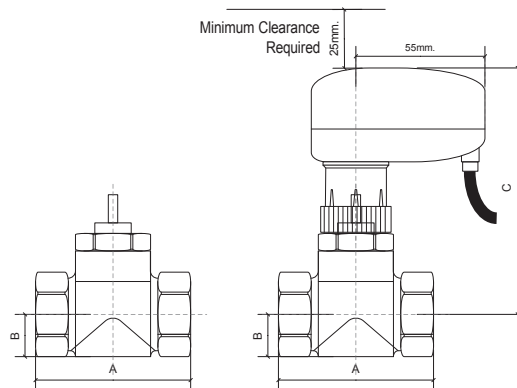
VA-7450 Actuated VG4000 Series Valve Dimensions, in. (mm) (Refer to Table 4)
